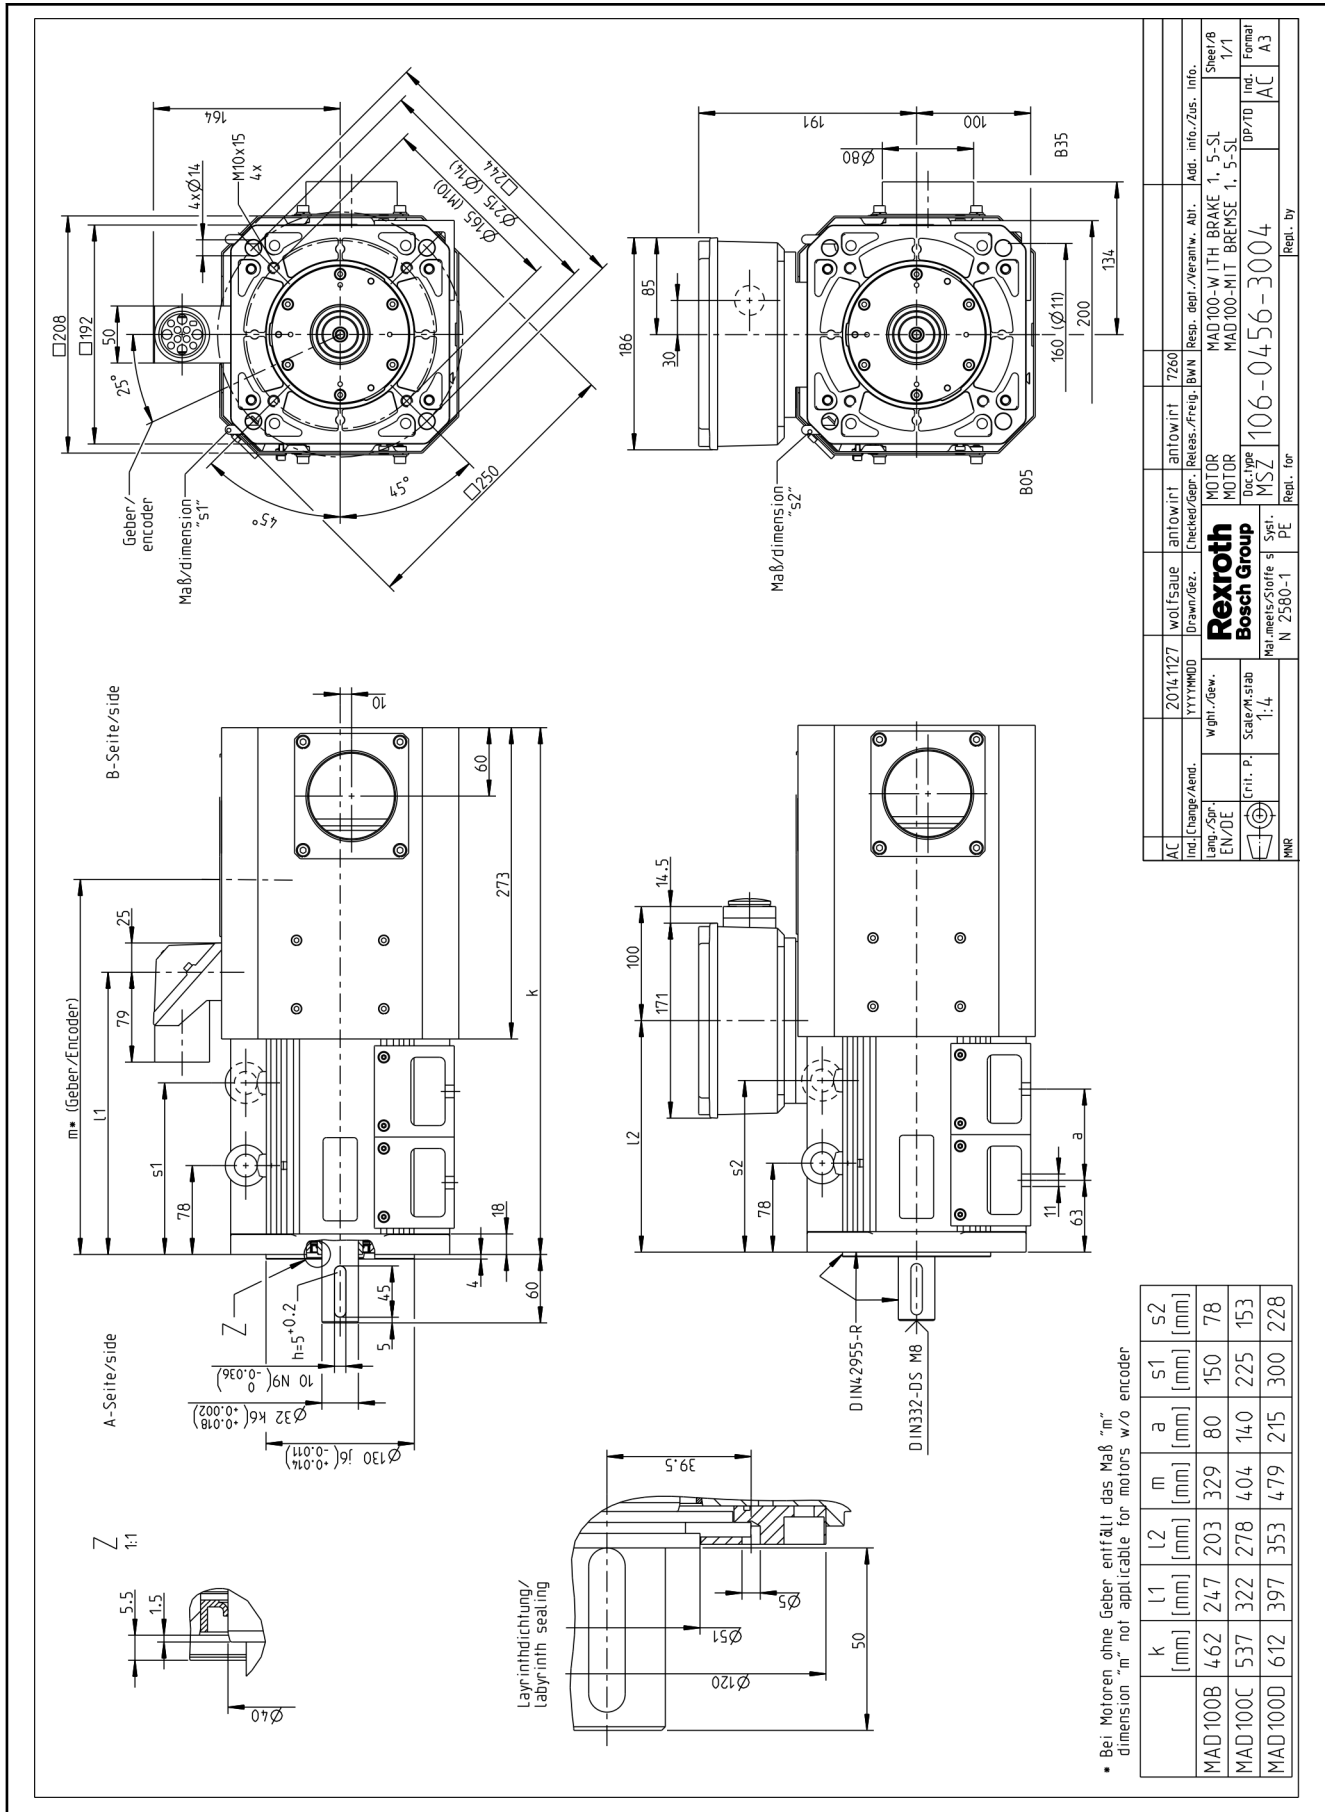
MAD100 with SL cooling, brake 1/5
